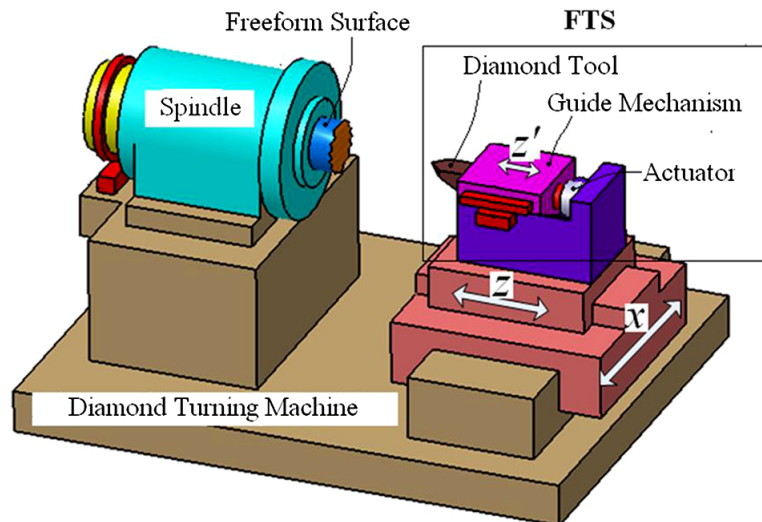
Fast Tool Servo used with a Diamond Turning Machine
